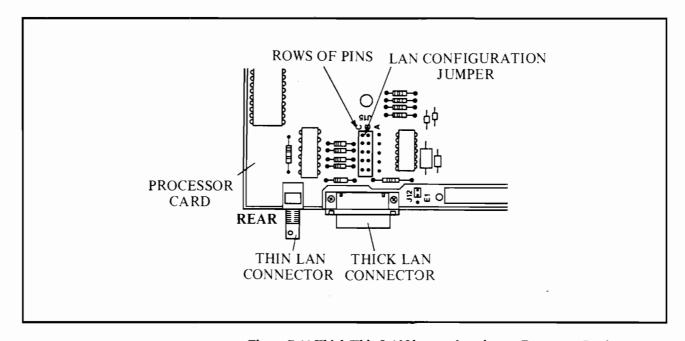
Thick/Thin LAN jumper location on Processor Card
